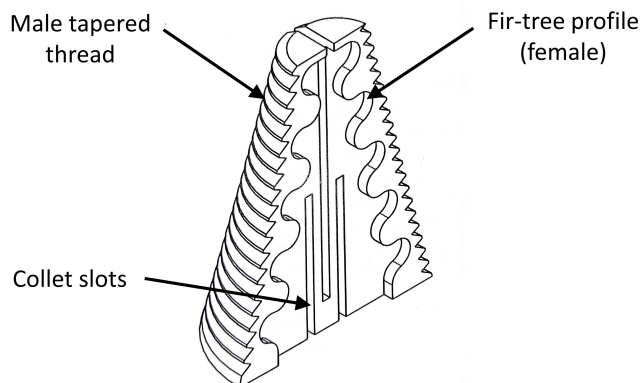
Fir-tree specimen clamp half, adapted from the drawing by Yende [89]
